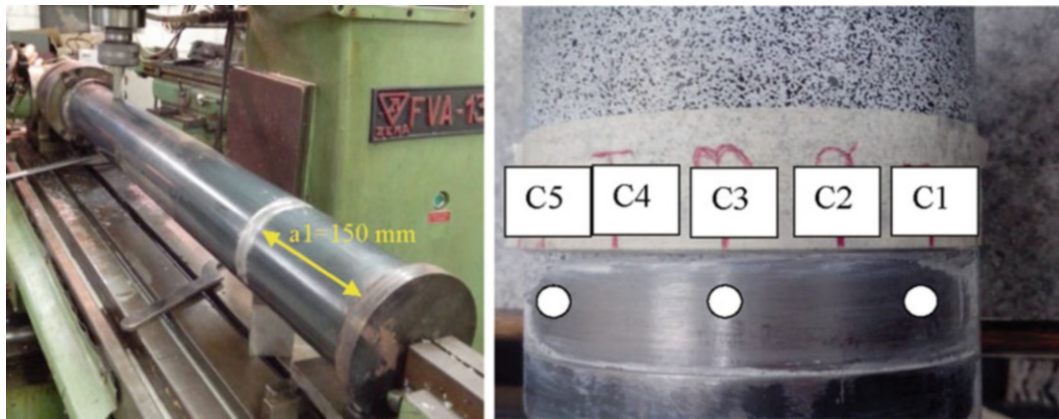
Cylindrical pipe pressure vessel specimen S2 showing machining of the circumferential defect (*left*) and location of remaining thickness measurement points (*right*). Three 5 mm length strain gage rosettes were bonded on the circumferential defect (points marked with *circles*)
